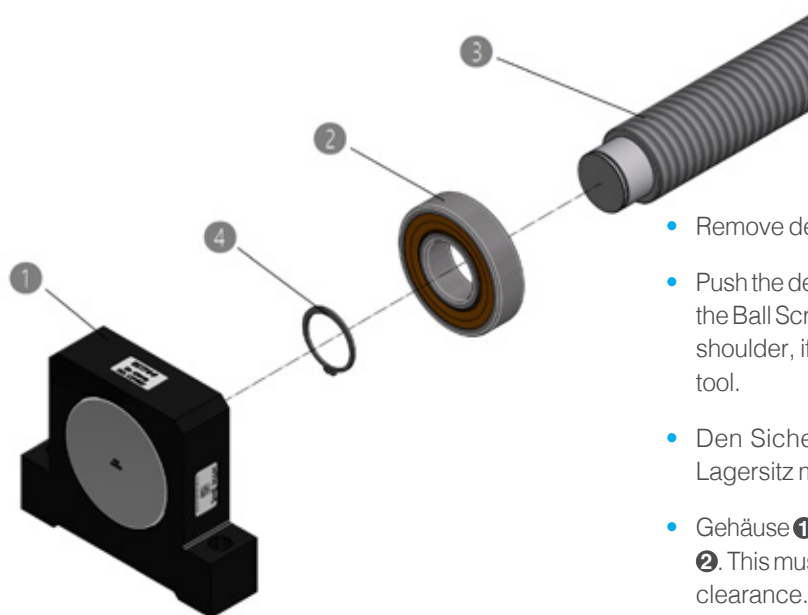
Assembly of floating bearing units type BSTF, BF, EF and FF
